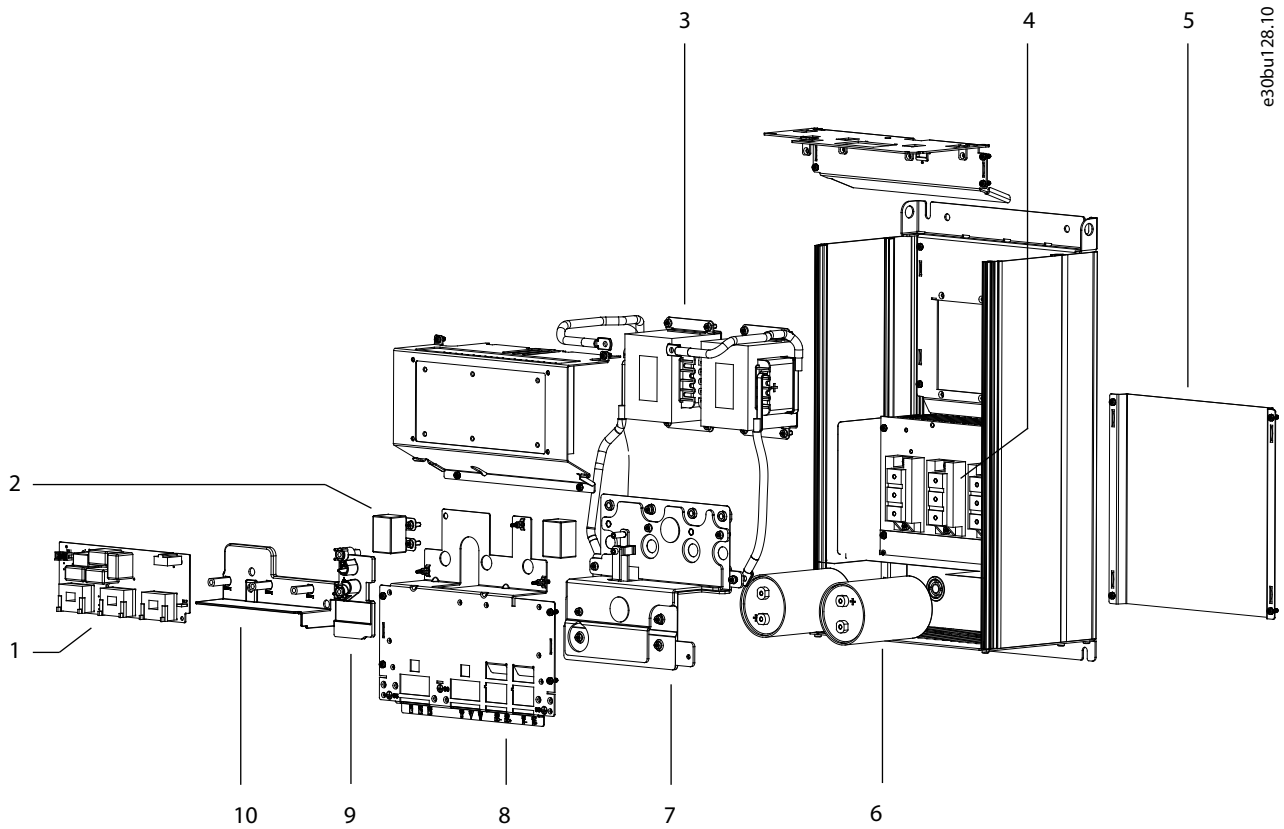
Top Layer Exploded View of C3 Enclosure. C4 Enclosure is Similar
